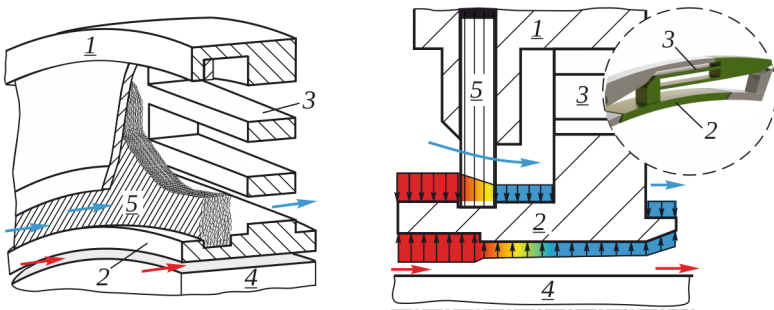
Hybrid brush seal: 1 – housing; 2 – pads; 3 – elastic support; 4 – shaft; 5 – secondary brush seal.
